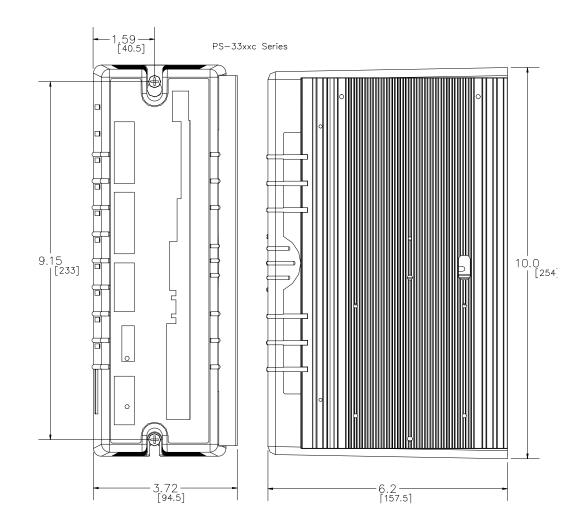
Outline Dimensions PS-3306c/PS-3310/PS-3320
